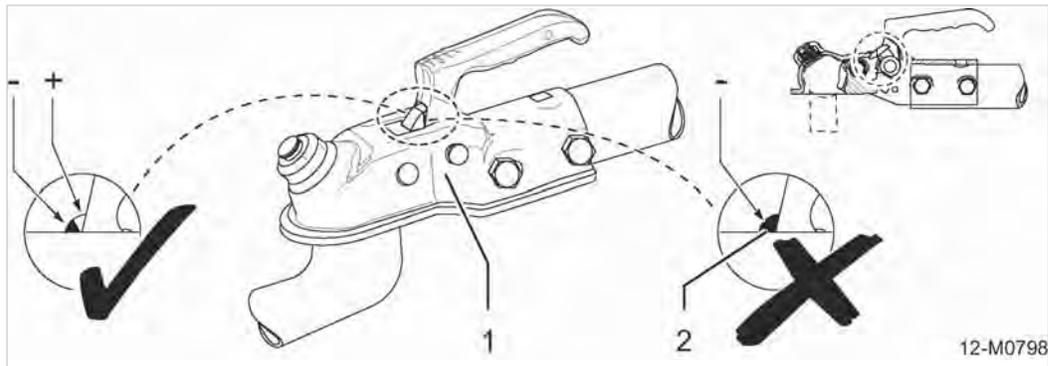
Ball coupling wear indicator (ALKO-EU version)
